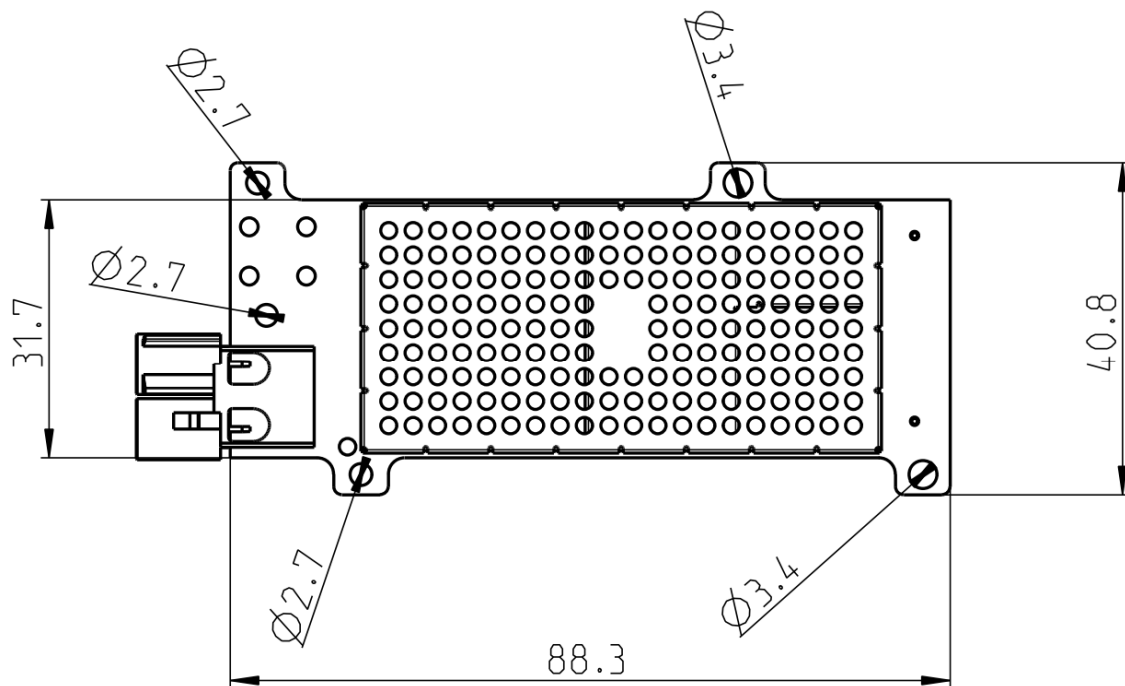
V1082-x13 Mechanical Dimensions (Top View).
